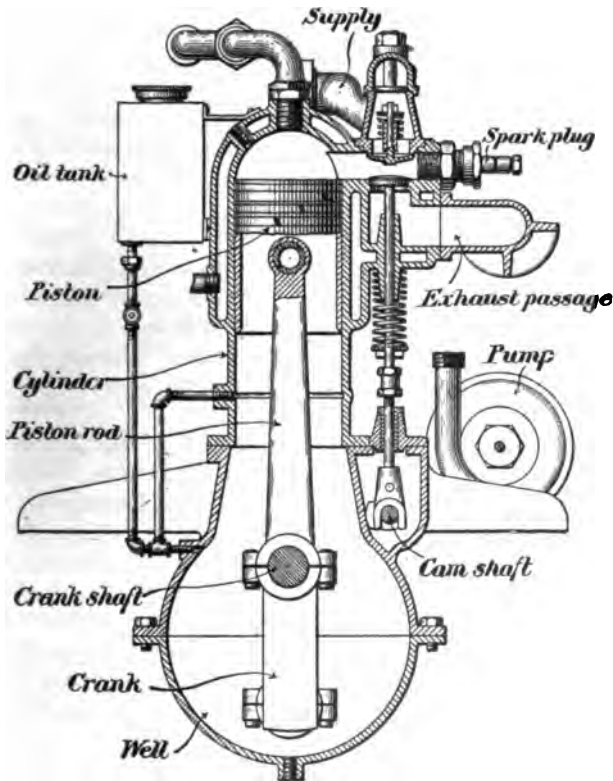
Section of One-cylinder of Locomobile Four-cylinder Gasoline Engine.
